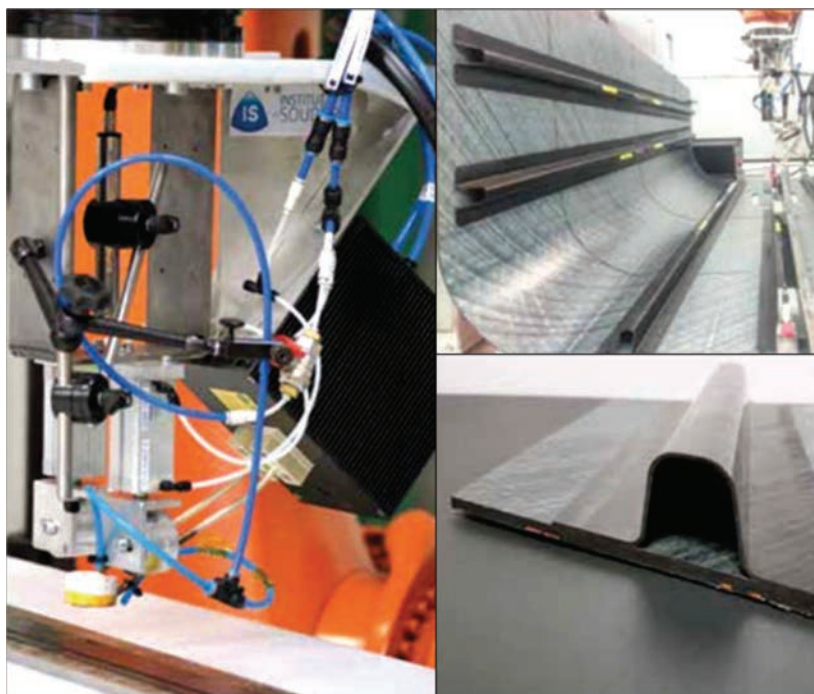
Induction coil and technology of welding stringers based on unidirectional carbon fiber and PEKK with lining developed by the Company Composite Integrity
